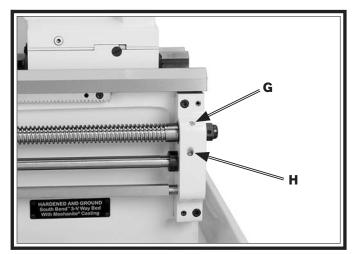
Leadscrew and feed rod end bearing ball oilers.
